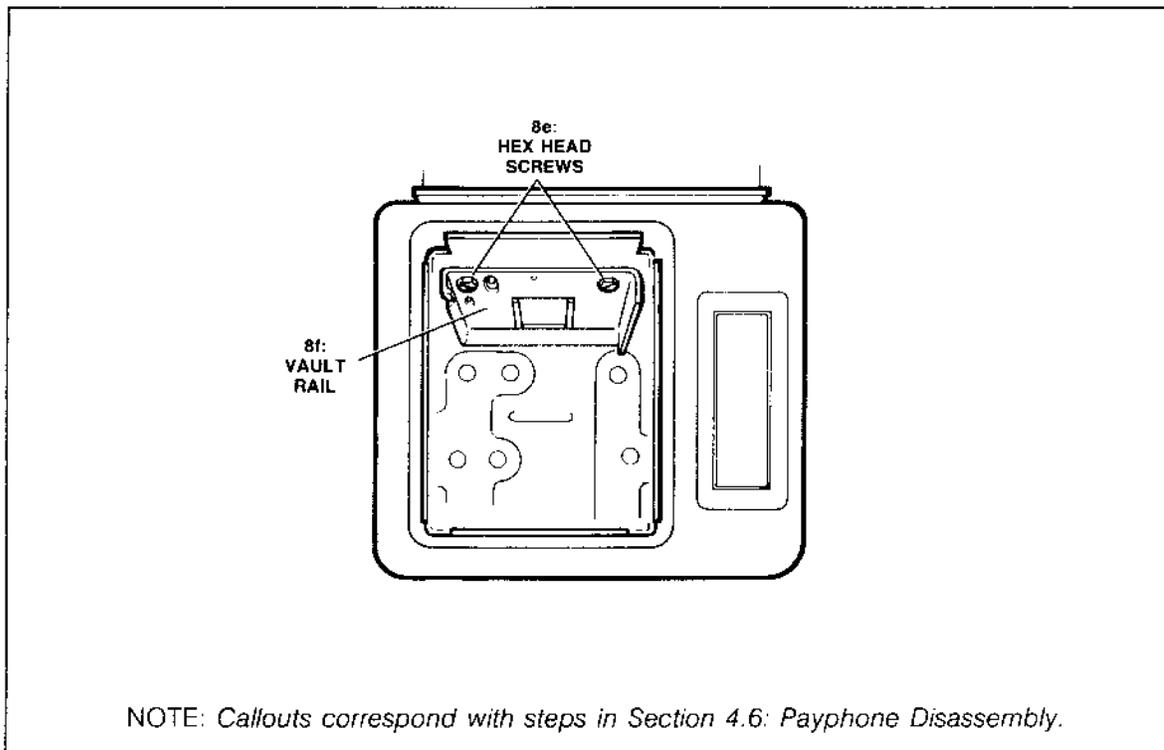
DISASSEMBLY --CASHBOX VAULT.
